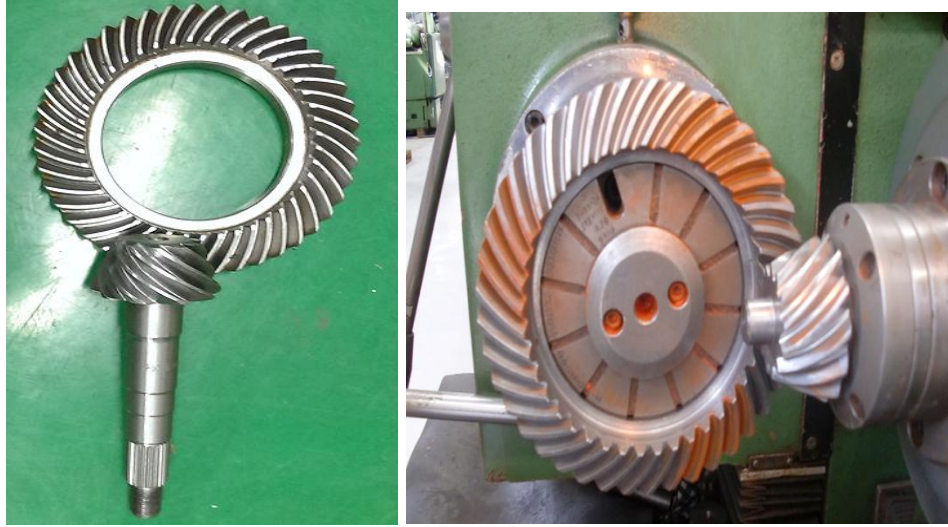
Photograph of the machined parts (Caption: photograph of the finished spiral bevel gear pair, showing the tooth surface topography and the meshing state.)
